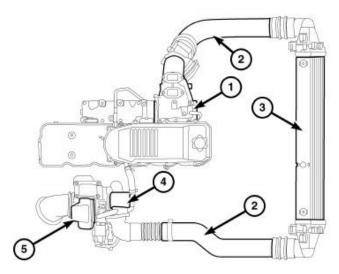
Charge Air Cooler Assembly Components Courtesy of CHRYSLER GROUP, LLC
